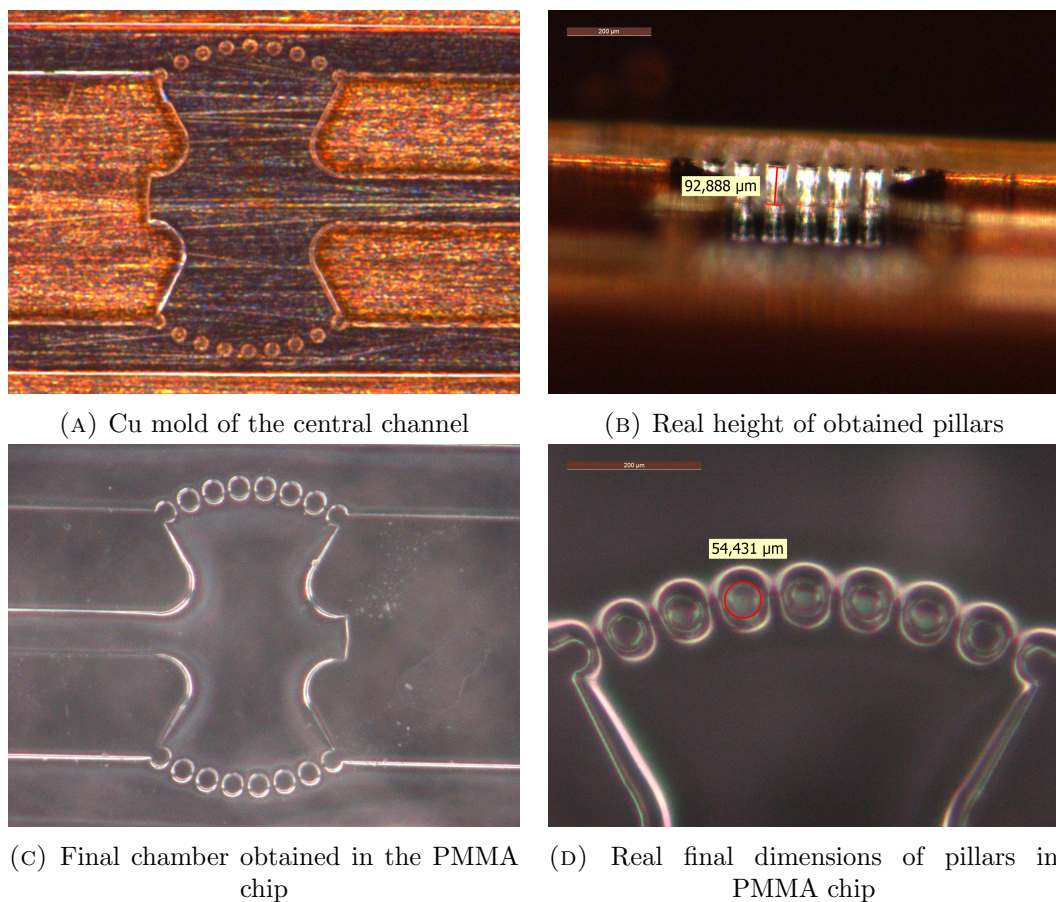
Cu mold and PMMA chip obtained by hot embossing process
